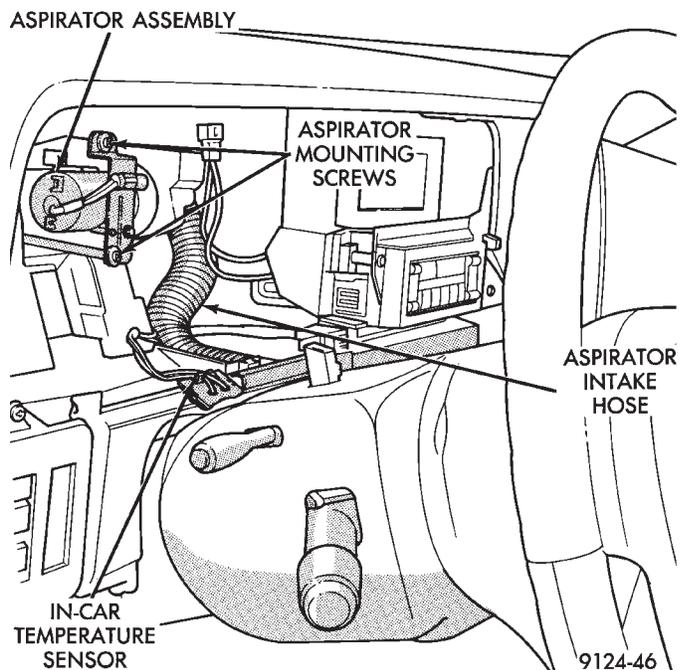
In-Car Temperature Sensor/Aspirator Assembly Removal and Installation
